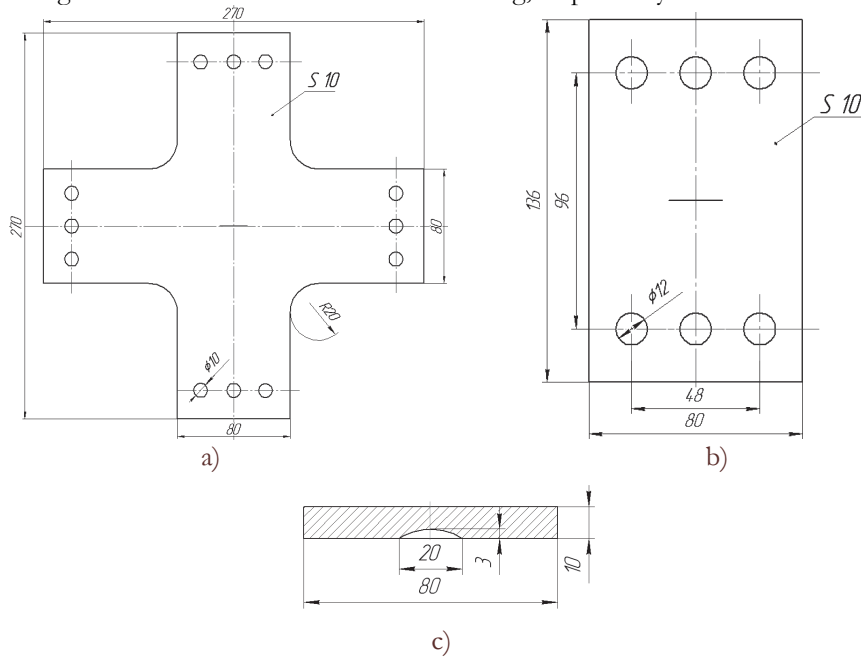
Details of the (a) cruciform specimen and (b) plate geometry and (c) initial notches.
